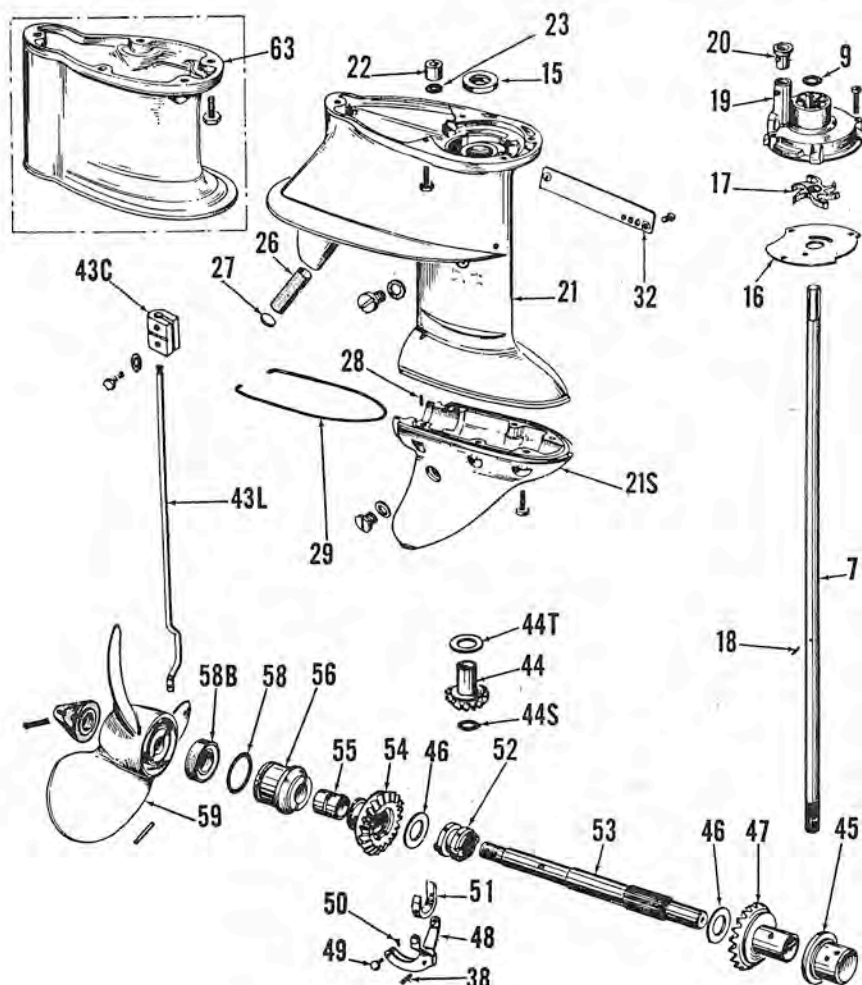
Exploded view of Sportwin gearcase assembly and water pump. Fastwin unit is similar.
